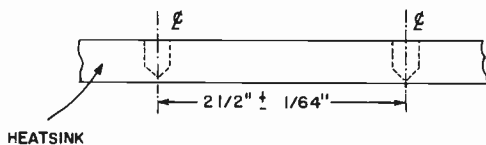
DRILLING THE HEATSINK FOR THE FLAT-BASE PACKAGE
